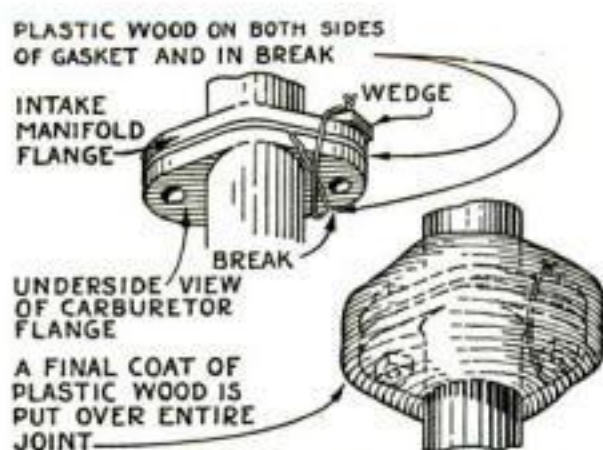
An emergency repair of a broken carburetor flange, using composition wood to patch.
